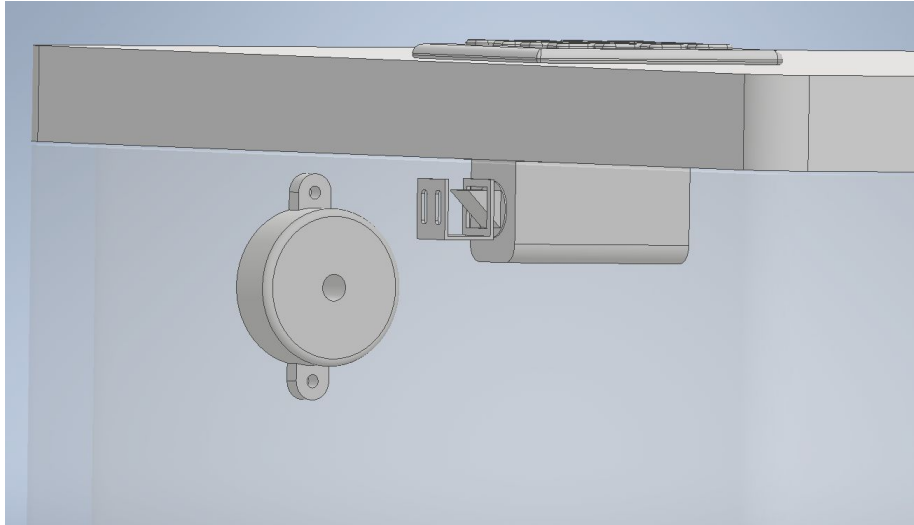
CAD Drawing for the locking mechanism, and attachment within the box for security reasons.
